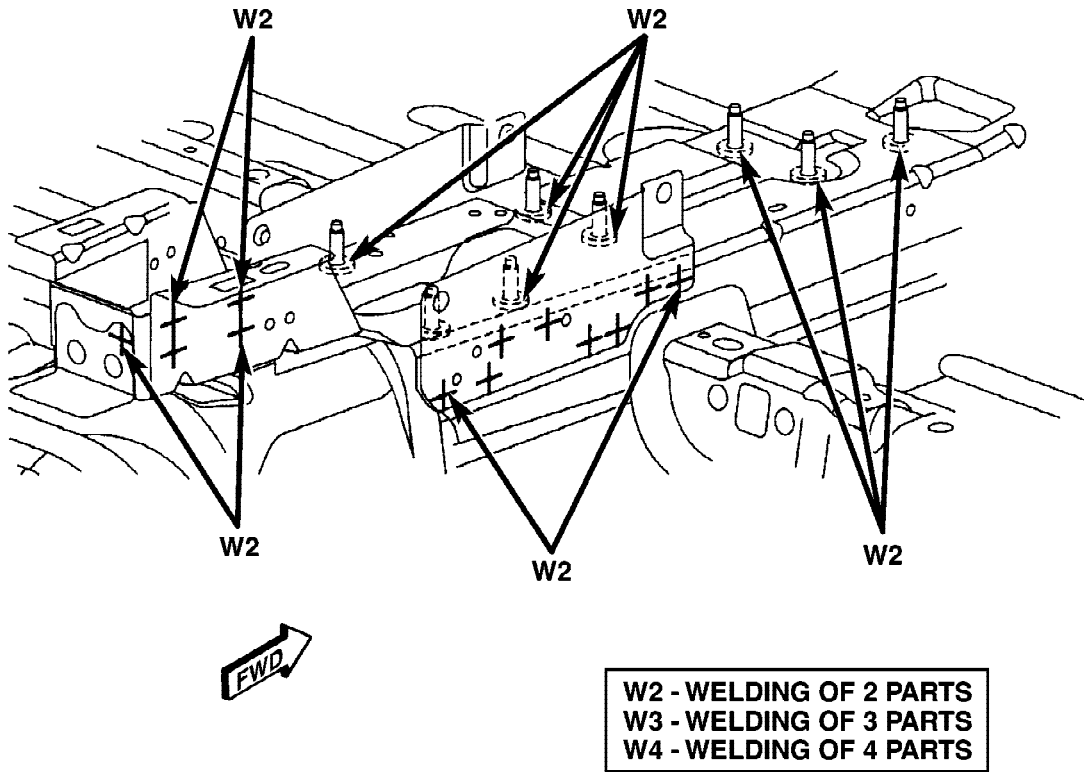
PARK BRAKE BRACKET & SHIFTER MOUNTING STUDS TO FRONT CONSOLE MOUNTING BRACKET
